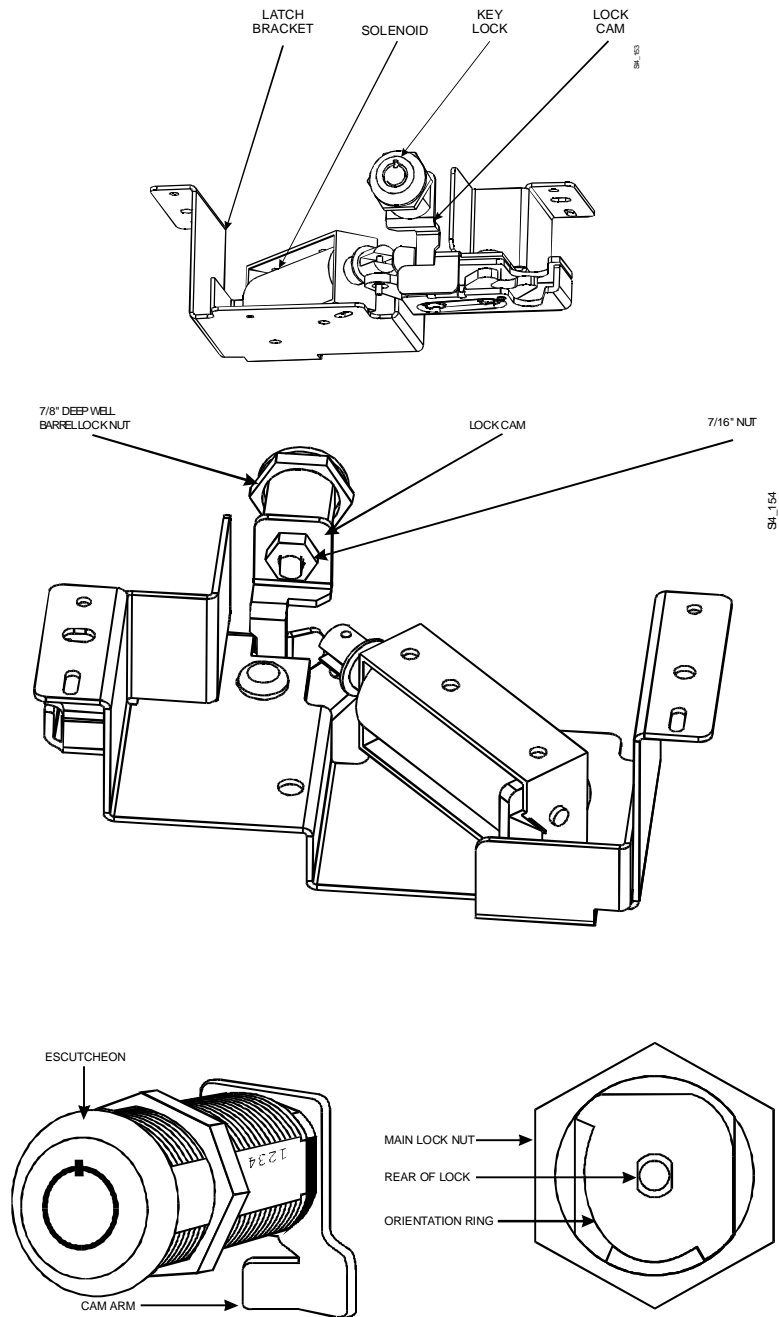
Accessing And Replacing SCM Locking Mechanism And Key Lock
